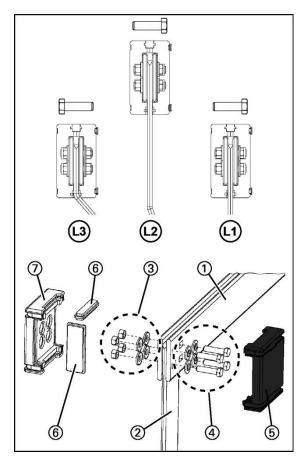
Busbar 2500 A, feeder ≤ 1250 A, Ur = 24 kV, end panel with insulating shells
